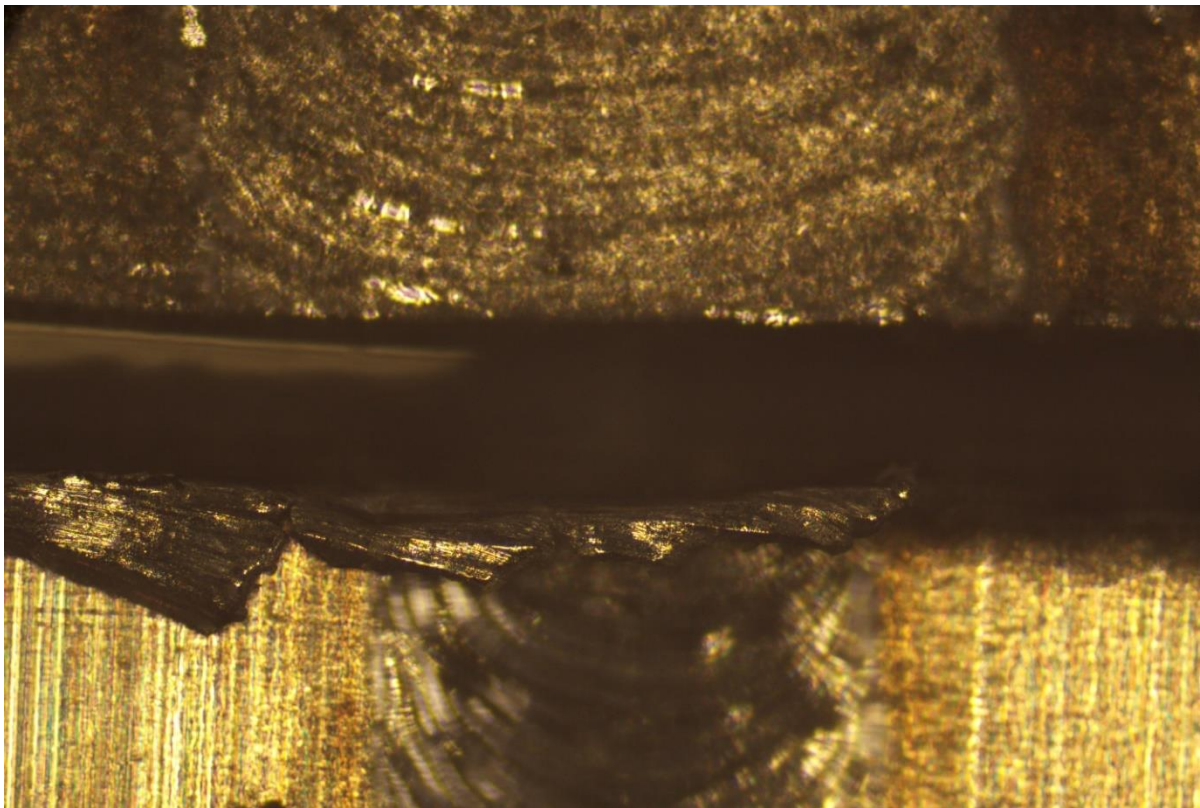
A comparison of the laser weld before and after the tensile test. The upper portion of the image is the tensile tested weld specimen 3 and the lower portion is the untested weldment.
